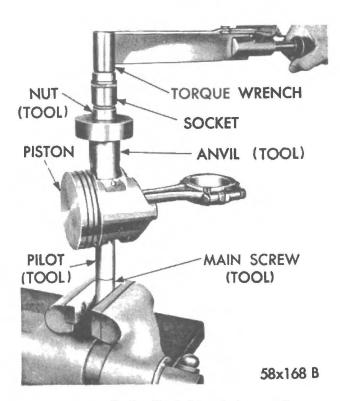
Testing fit of piston pin in connecting rod (Tool CA-3724).
